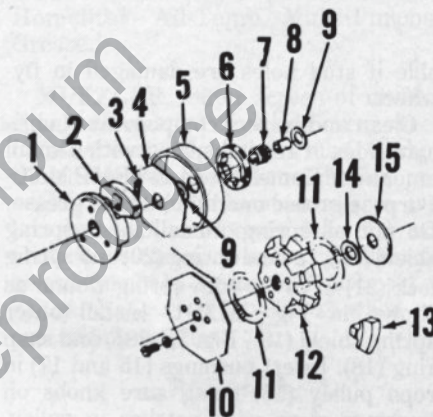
Exploded view of two clutches which may be used on Models 450, 450W, 450HG and 450SL.
